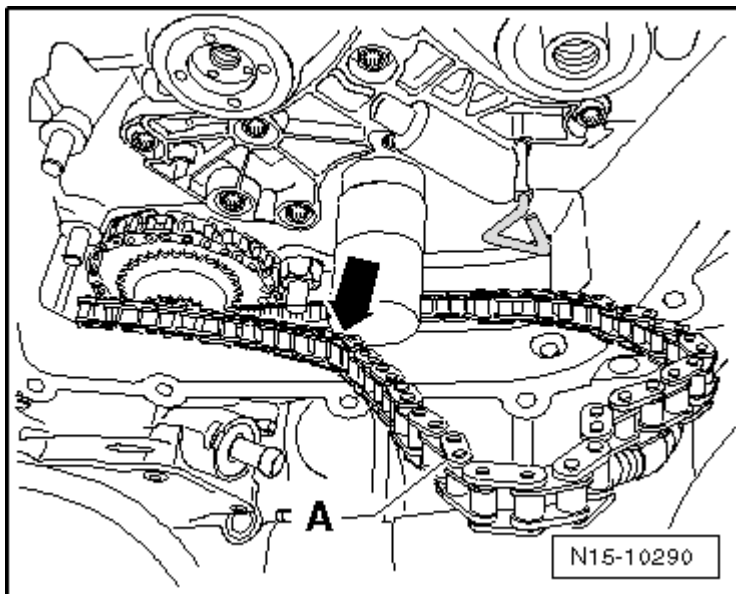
Holding Timing Chain To Be Able To Lay It Under Pipe Connection
